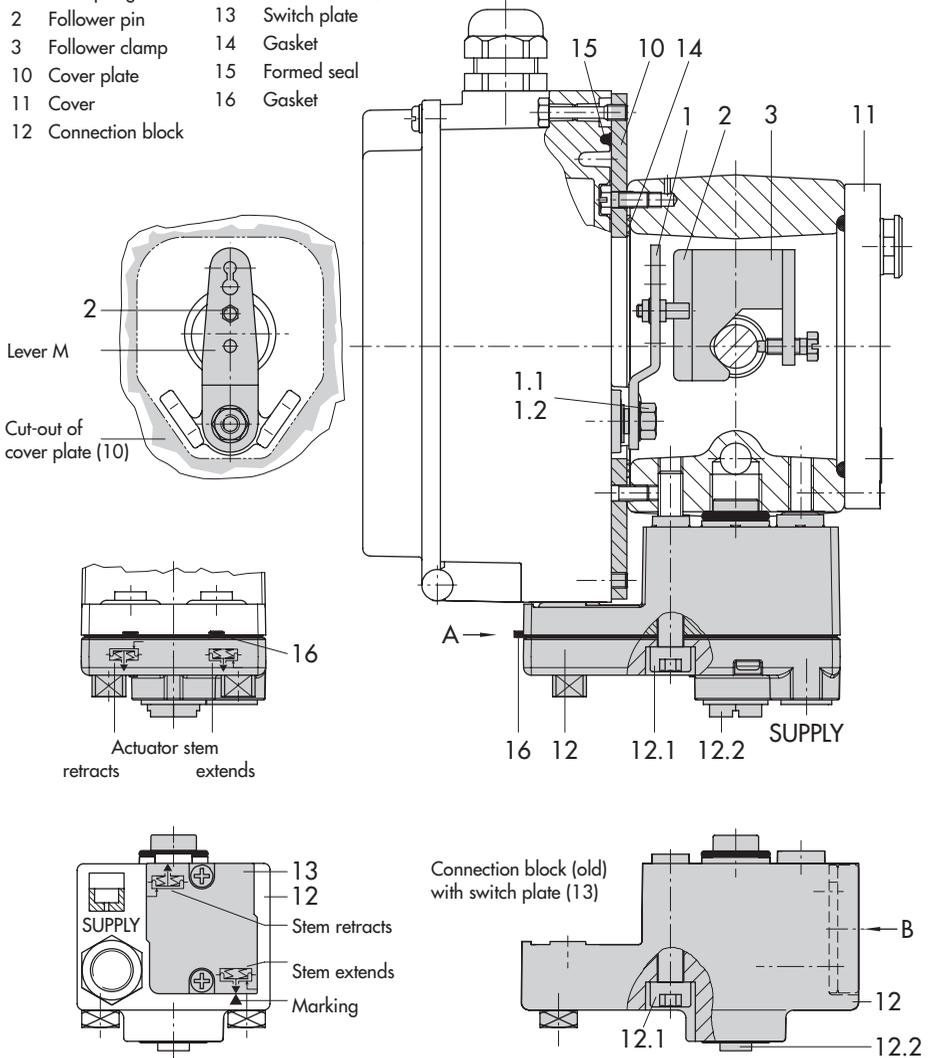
· Direct attachment – Signal pressure connection for Type 3277 Actuator with 240, 350 and 700 cm²
